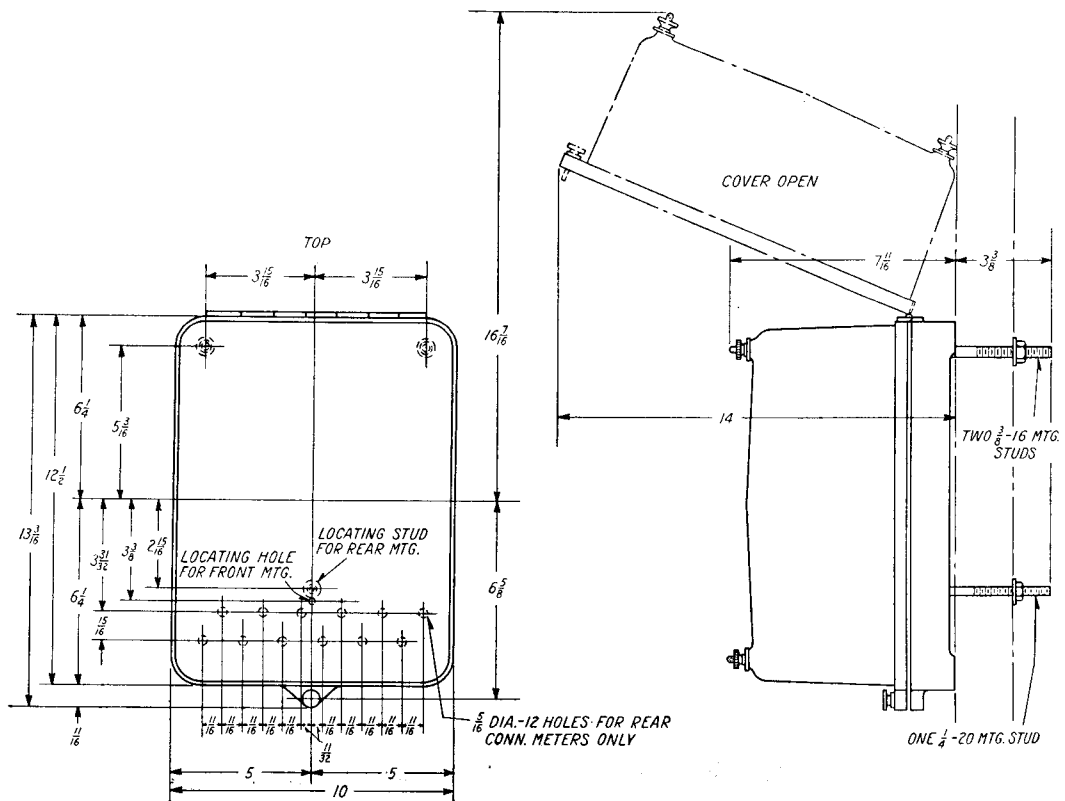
OUTLINE AND DRILLING PLAN 2-ELEMENT, 3-PHASE, 4-WIRE METER
